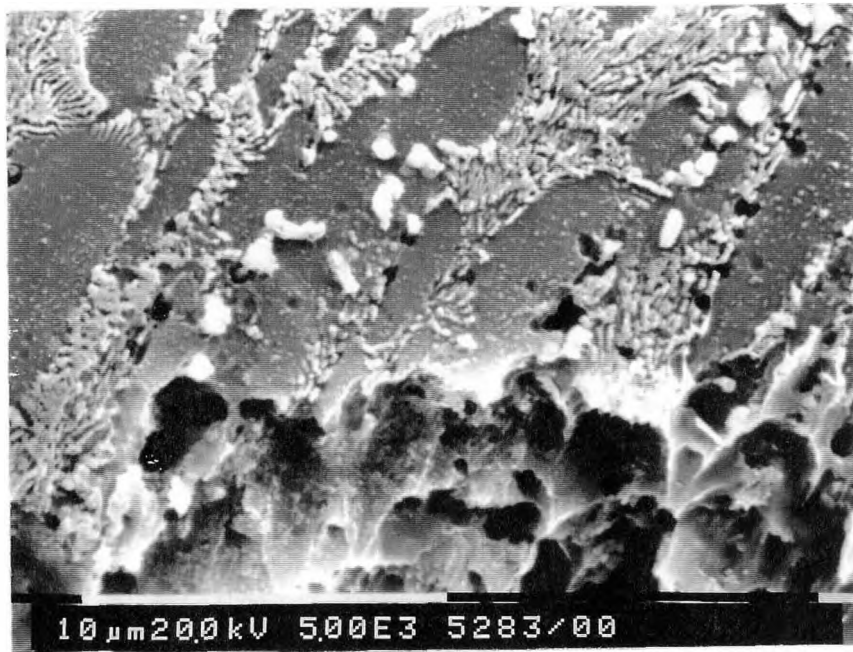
An examination of the fracture surface and longitudinal section.
